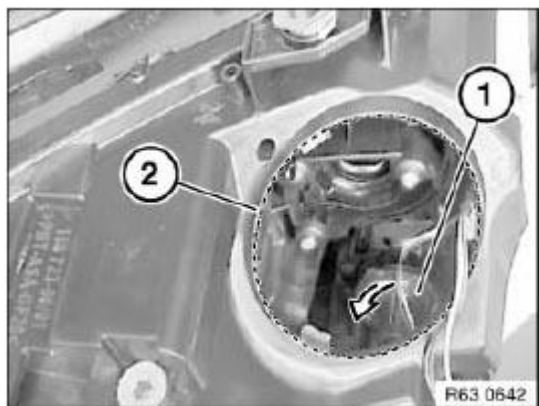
Turning Holder With Bulb For Side Marker Lamp
